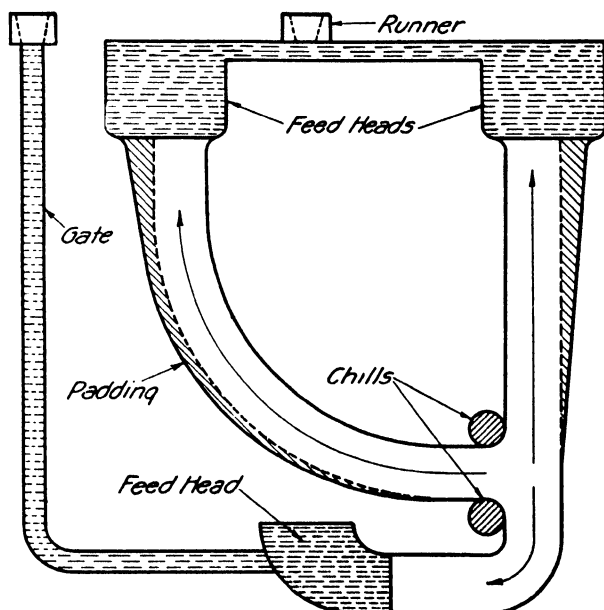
Cross-section view through the turbine casing of Fig. 90.
